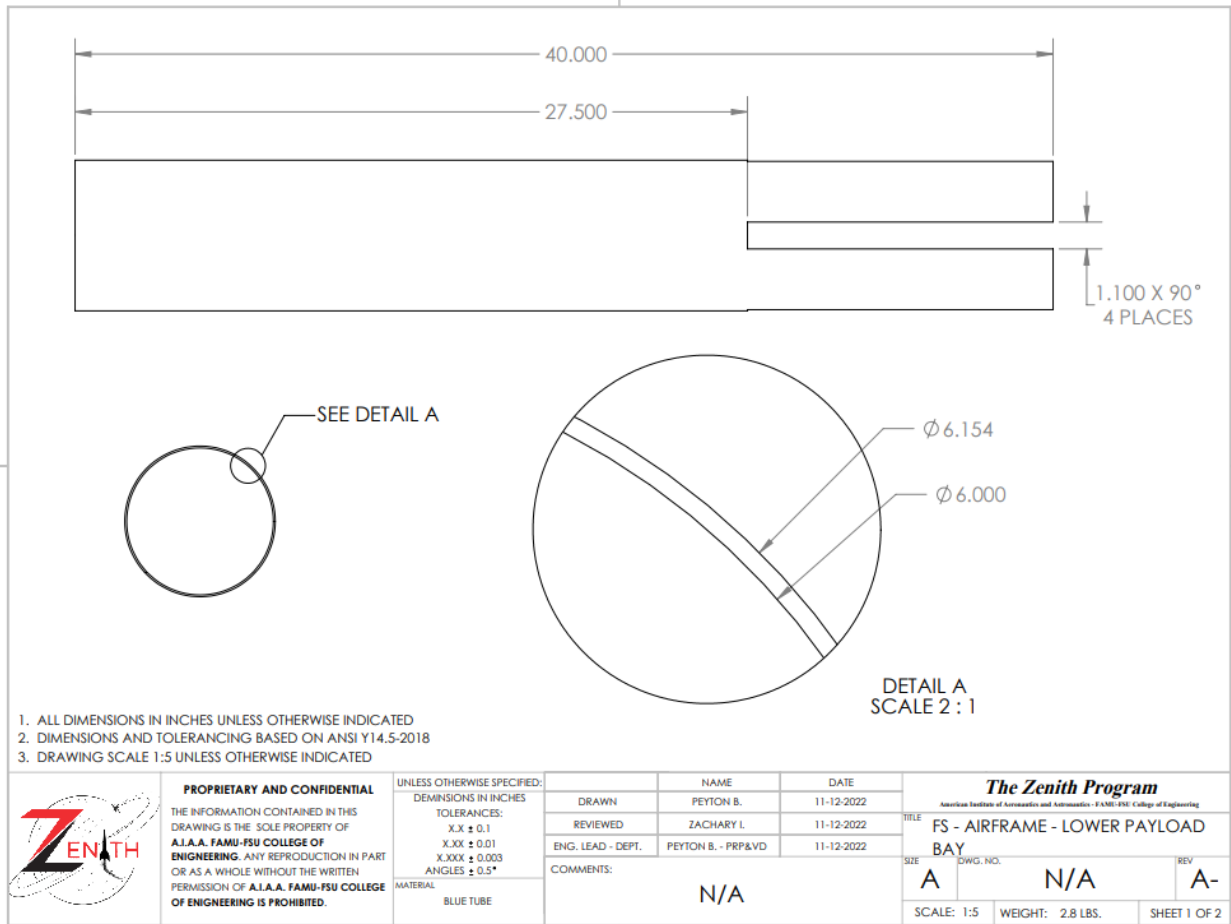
Lower Payload Bay Airframe CAD Drawing
